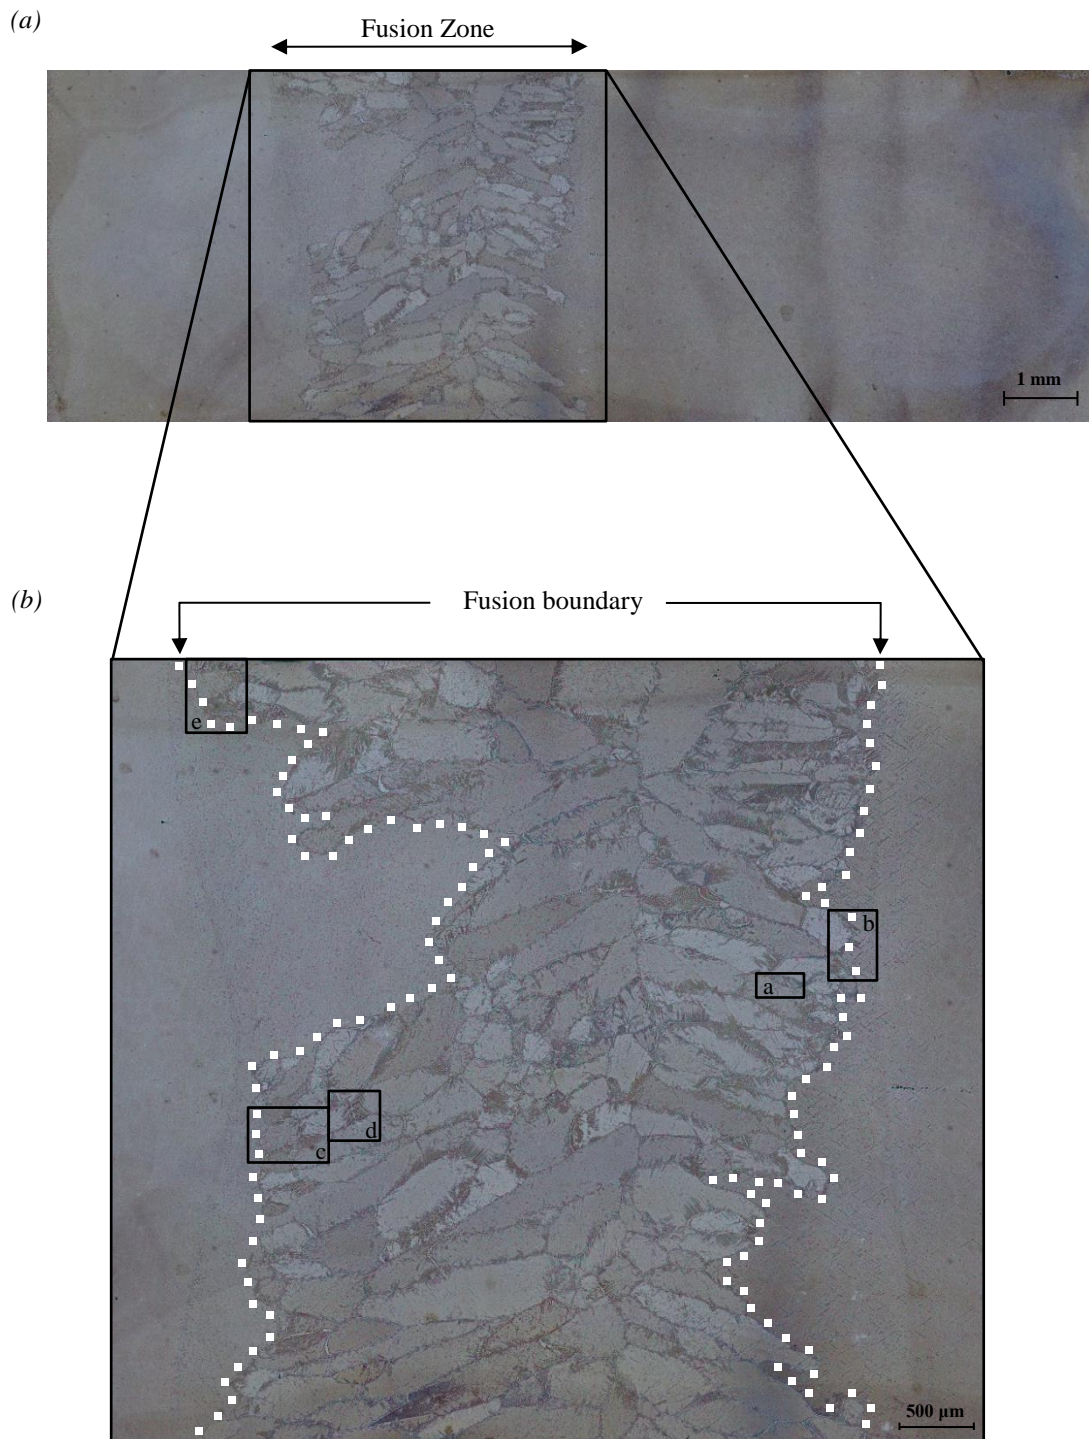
(a) Macrograph of the welded Cu-Al-Mn similar joint. (b) Detailed macrograph of the fusion zone, with letters from "a" to "e" identifying a specific region.
